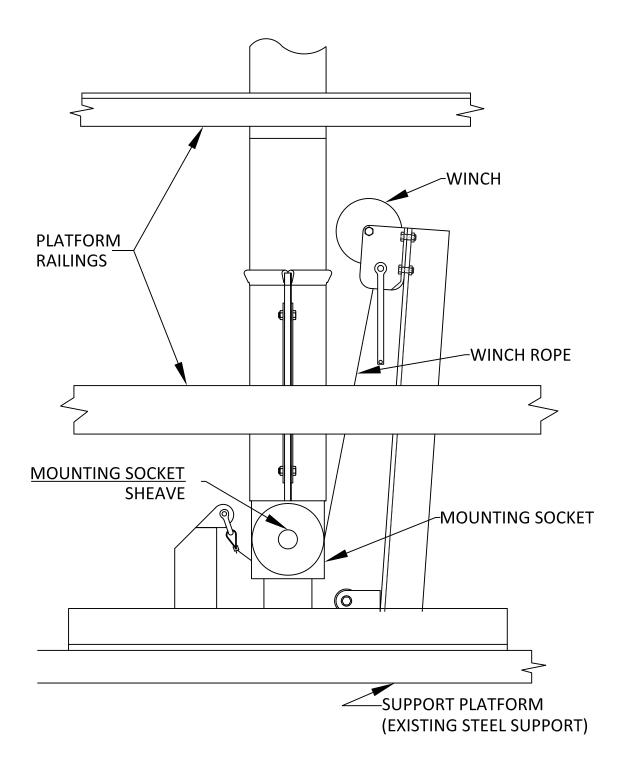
CHECK MOUNTING SOCKET SHEAVE FOR FREE ROTATION (Ref. Section 6.1.7)
